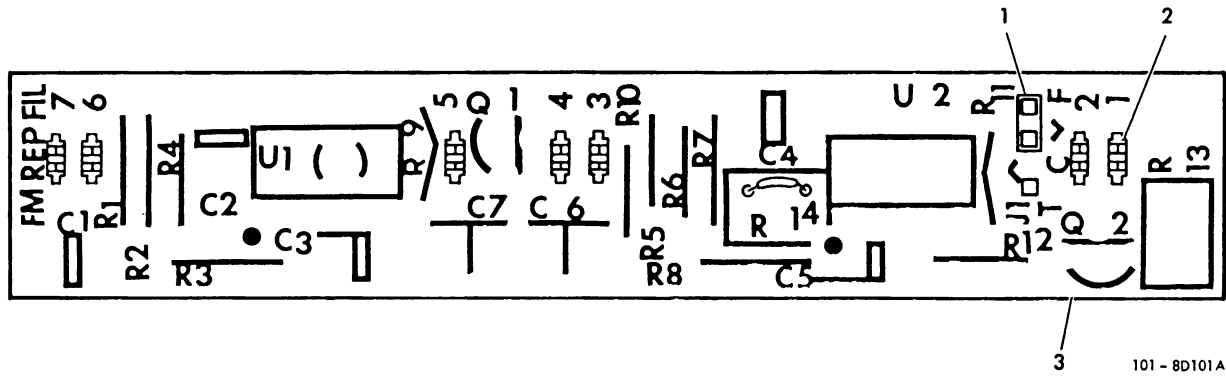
FM REPRODUCE FILTER CIRCUIT CARD ASSEMBLY
